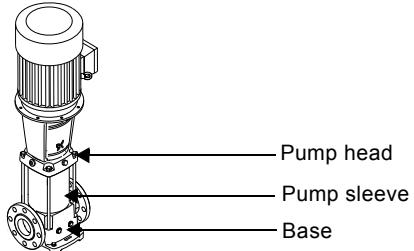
Hot or cold surfaces on a CR, CRI, CRN pump
